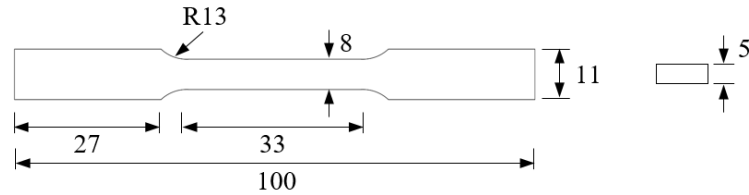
Dimensions of tensile coupons (dimensions in mm)
